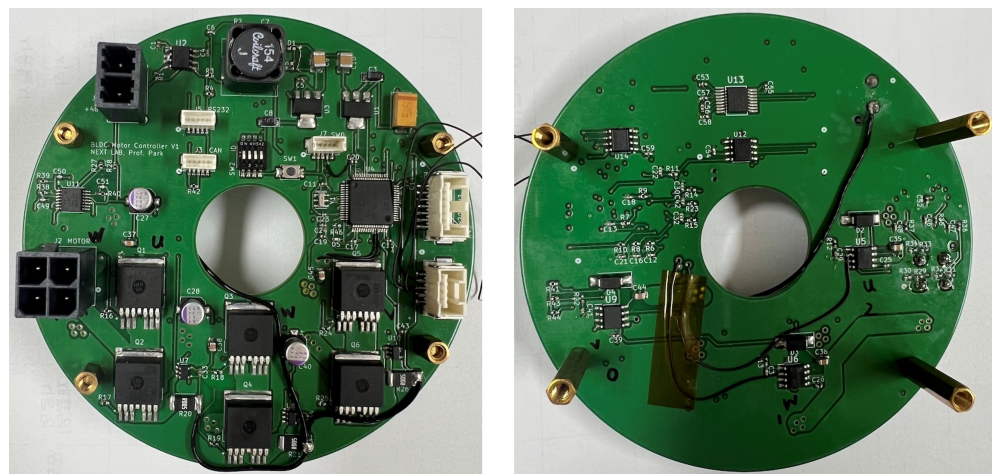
The top (left) and bottom (right) views of the fabricated motor controller PCB prototype.
